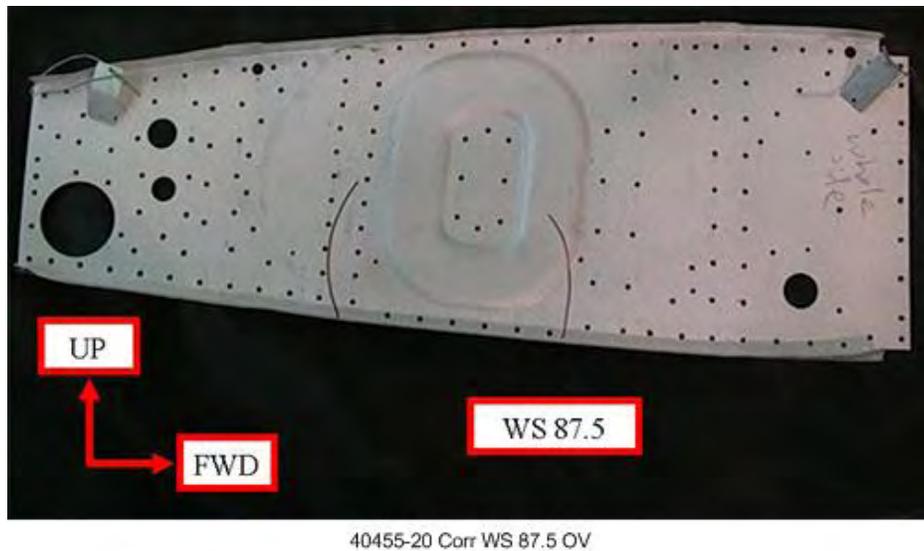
Location of Light Corrosion on the Left Wing Rear Spar Rib Assembly WS 87.5
